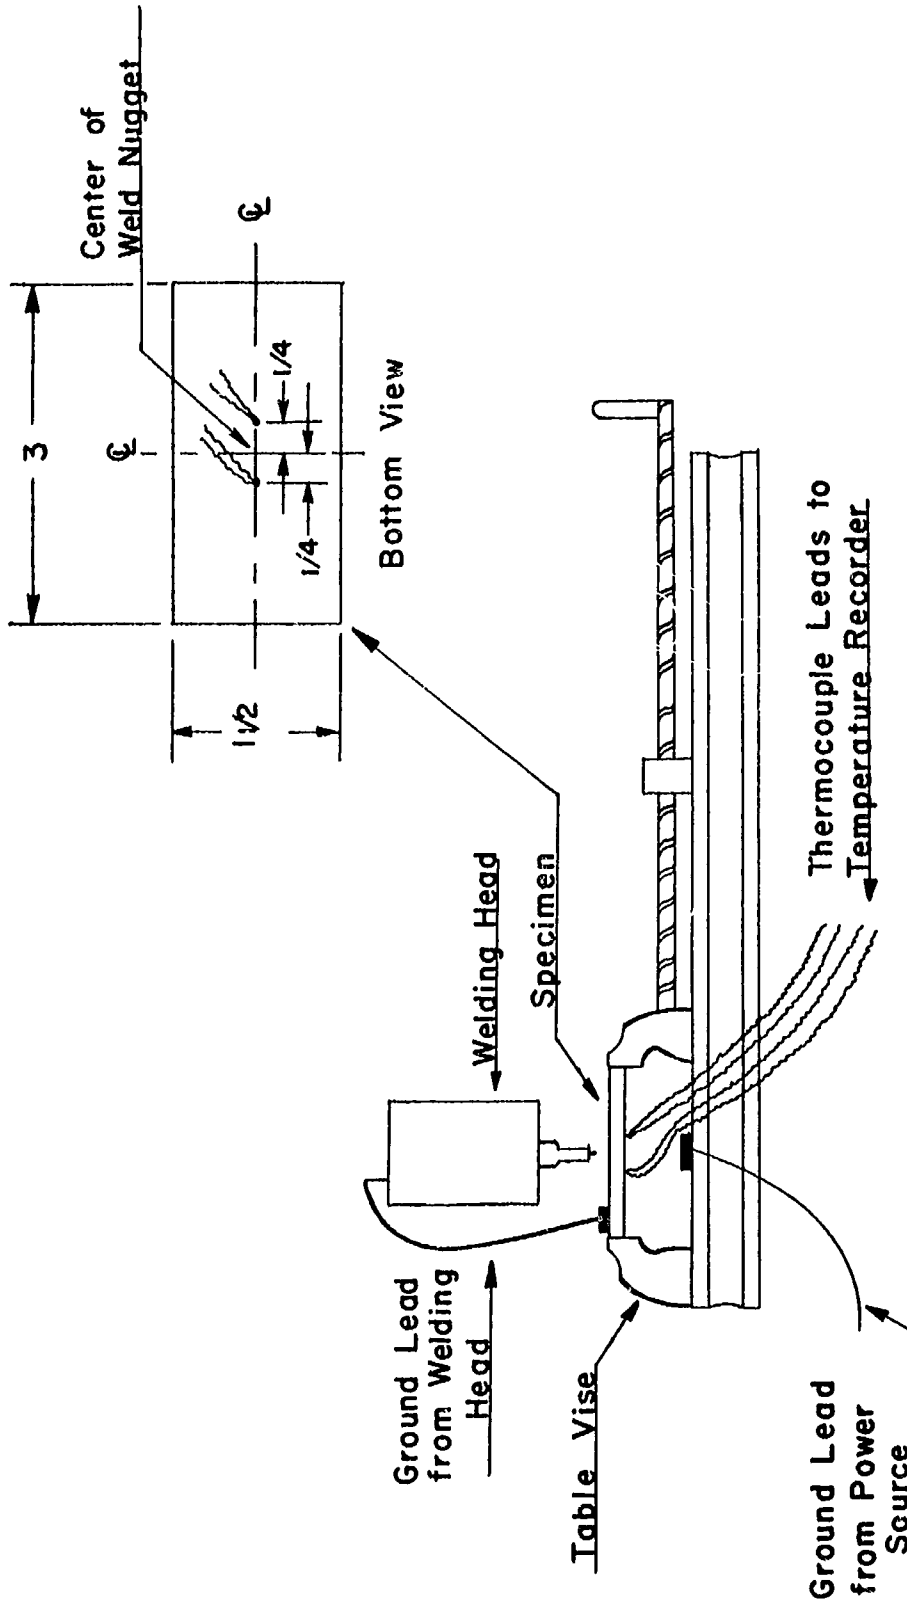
Schematic Illustration of Specimen Clamped for Welding. Nominal dimensions shown in inches.
